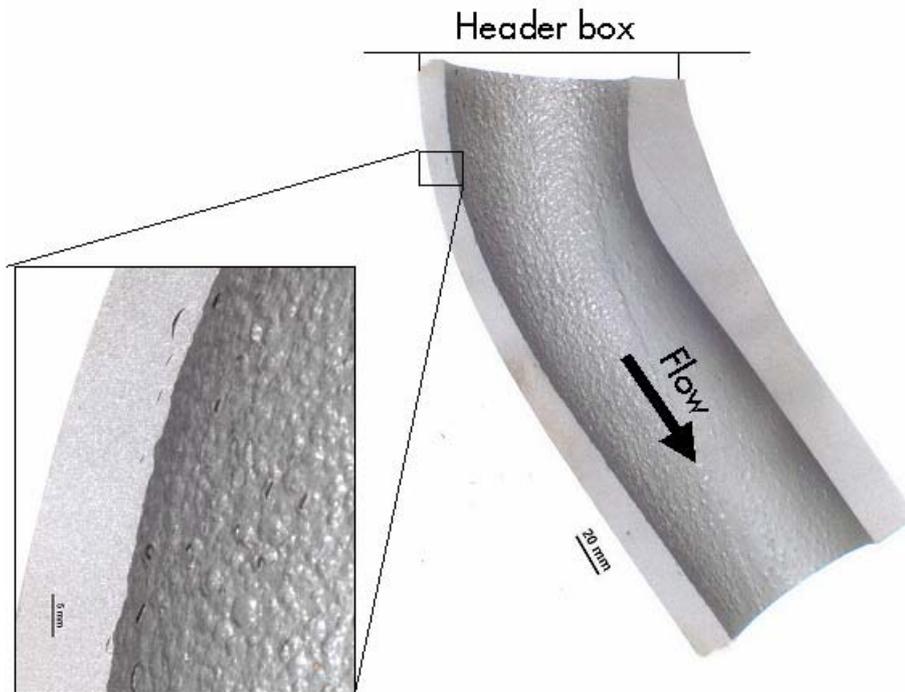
Cross-section of a bend of air cooler outlet pipe, showing the position of maximum wall loss and the presence of blisters in the pipe wall.
